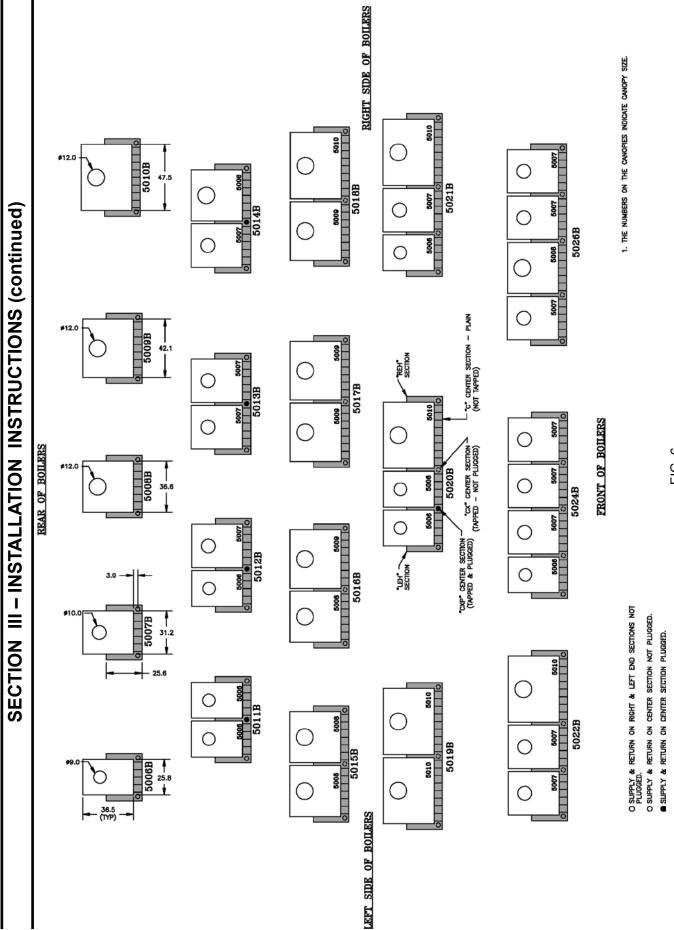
ARRANGEMENT OF SECTIONS AND CANOPY(S)
